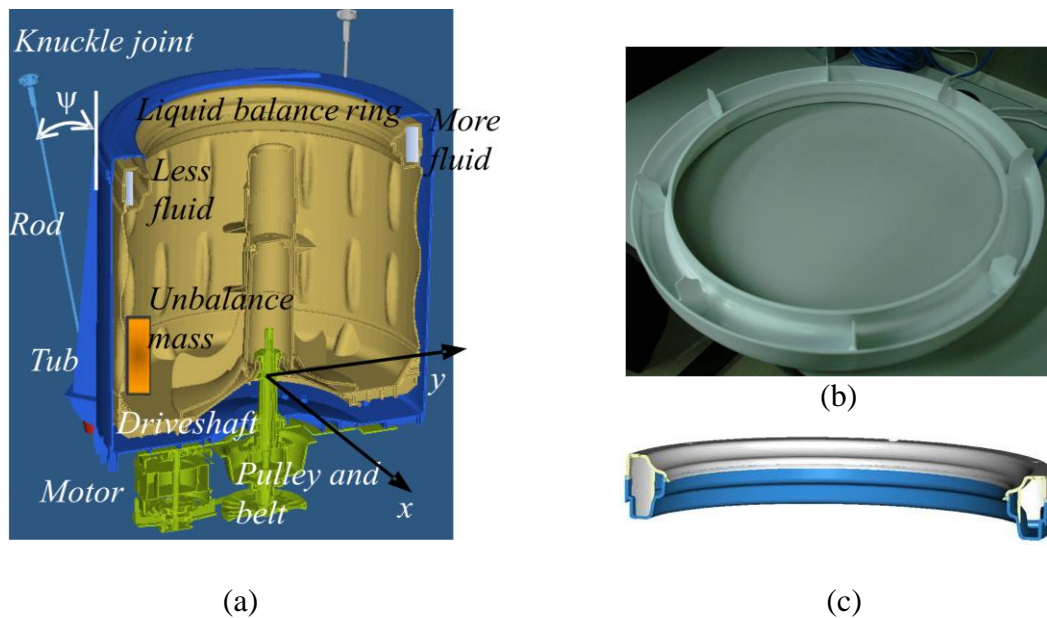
Washing machine; (a) cut-away view, (b) balance ring lower part with molded baffles, and (c) balance ring assembly cross-section view (courtesy of *mabe S.A. de C.V.*).
